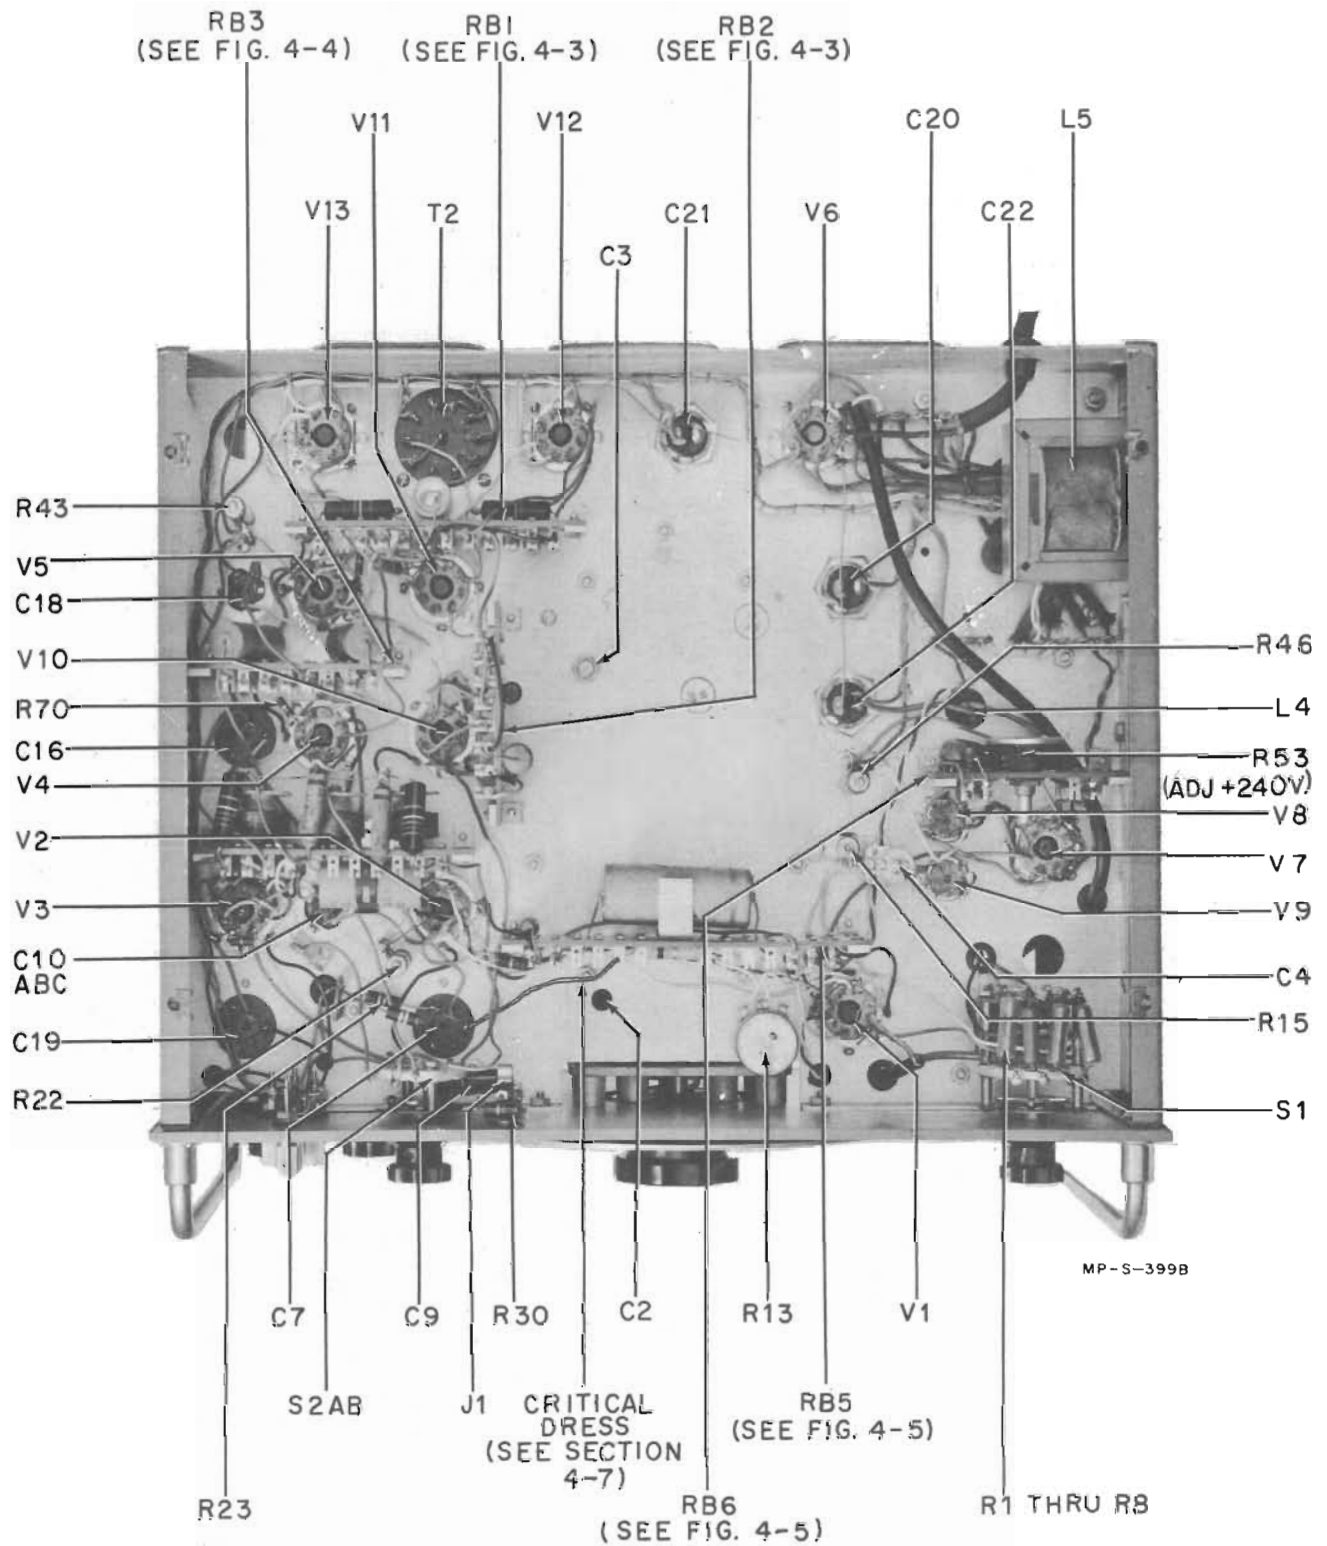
Model 233A Bottom View with Bottom Plate Removed
